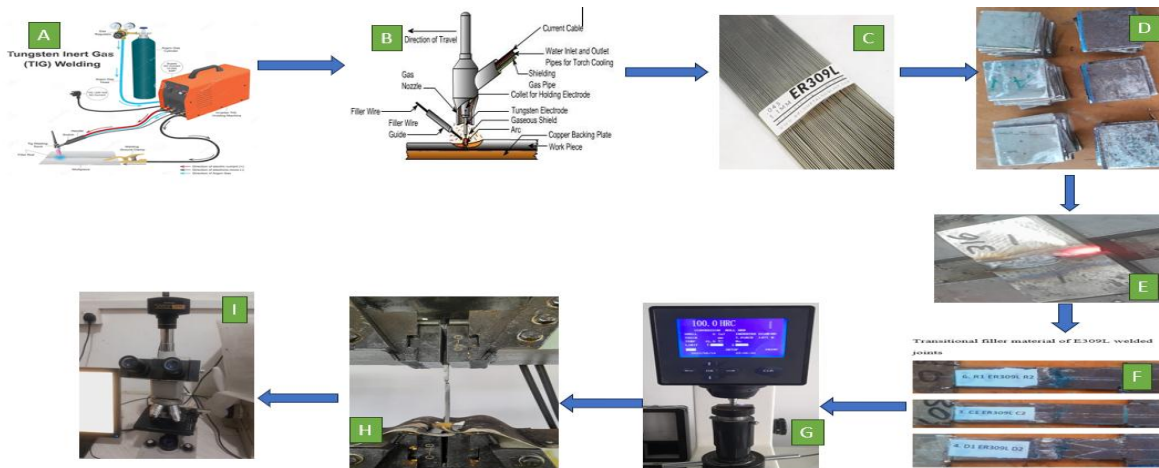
Block Diagram of Gas Tungsten Arc Welding for ER309L Filler Materials Joining Experimental Set Up System (Tungsten inert gas welding station setup; working principles of TIG Welding Equipment; Transitional filler material of ER316L; samples of AISI 1010LCS/ASS304 Preparations; Single butt joint welded; Transitional filler material of E309L welded joints; Digital B Rockwell Hardness Testing Machine; tensile test machine; and Microscope Digital Camera 14MP mode of MU1400 USB2.0 DC 5V 250mA)
